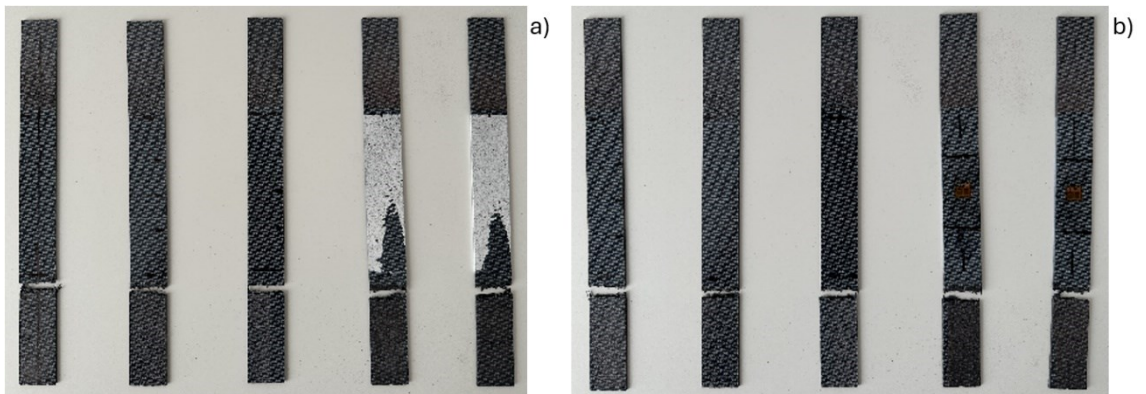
Failed tension test specimens in weft direction a) front face and b) back face
